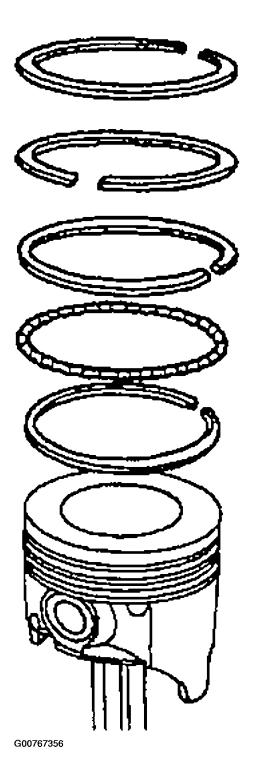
Exploded View Of Piston Rings Courtesy of SUZUKI OF AMERICA CORP.
